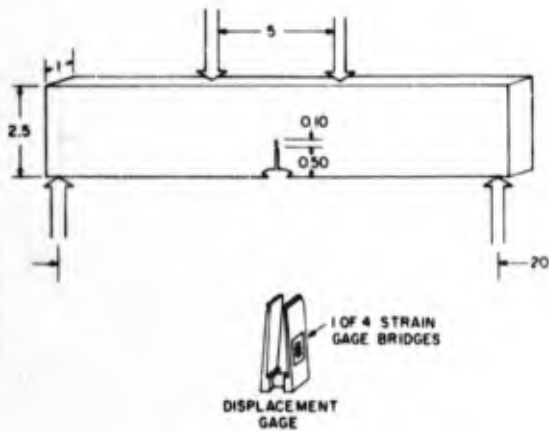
Dimensions of the four-point-loaded notch bend specimen (in inches), and a sketch of the beam displacement gage used to detect initial crack instability.
